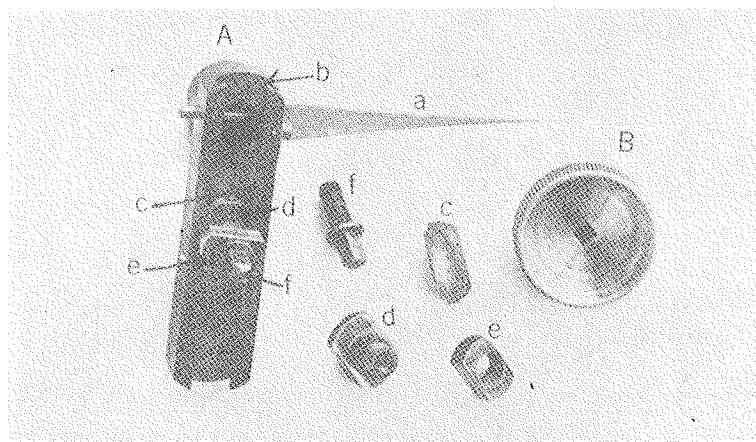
TIDE-PREDICTING MACHINE, DETAILS OF CONSTITUENT CRANK.
